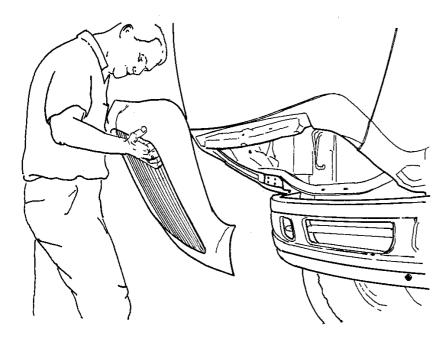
Grille / Shroud Tab and Mounting Hole Inspection
